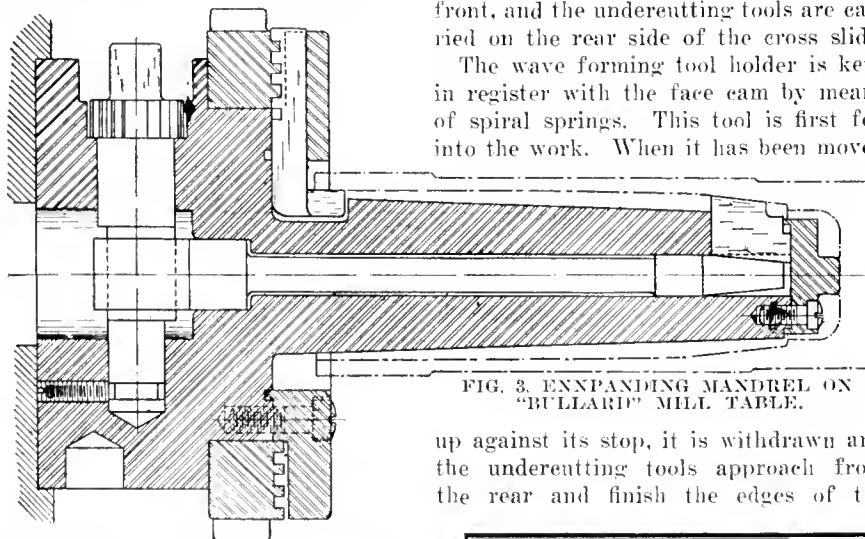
EXPANDING MANDREL ON "BULLARD" MILL TABLE.
